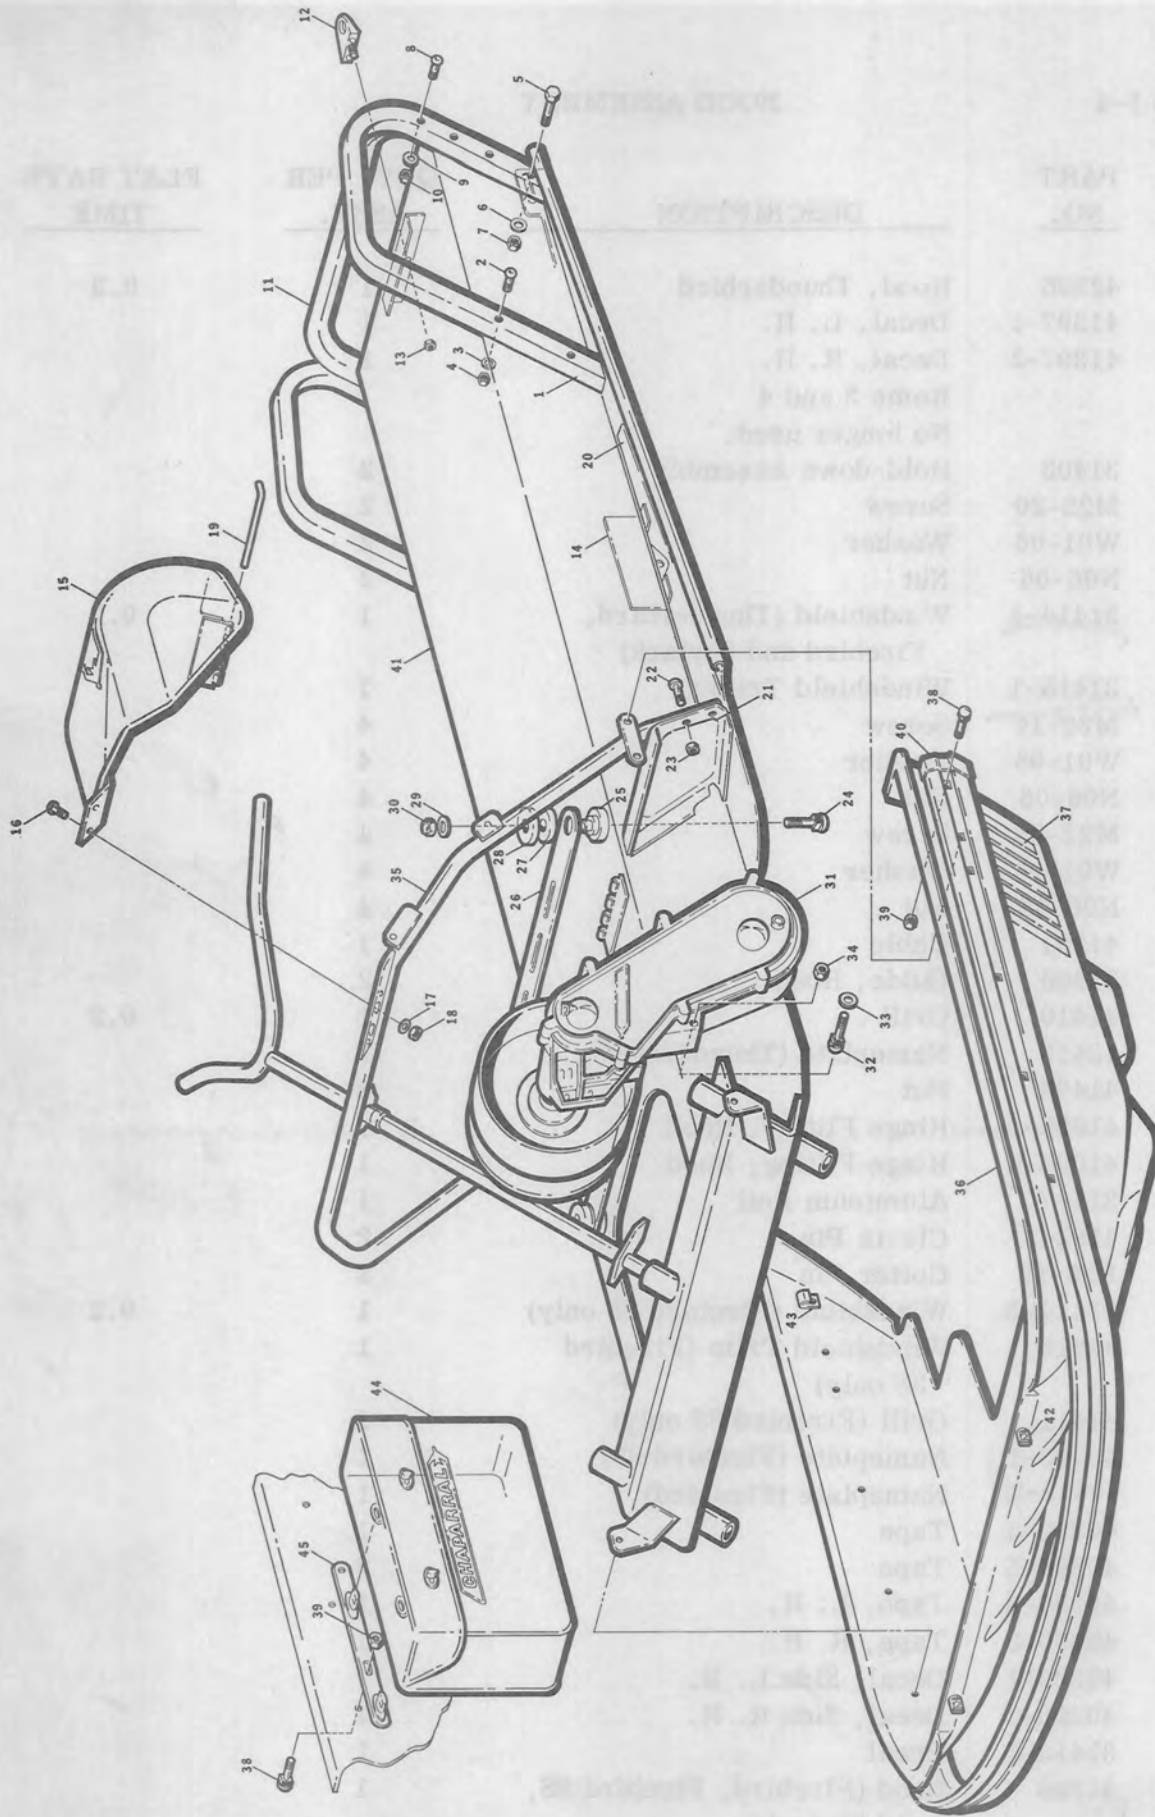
CHASSIS AND PAN ASSEMBLY
